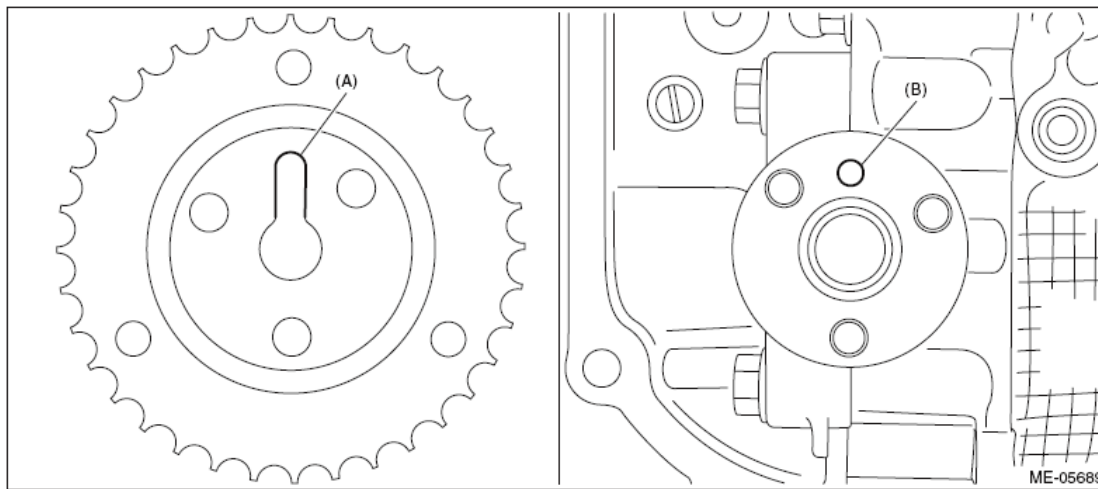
Identifying Knock Hole Of Exhaust Cam Sprocket And Knock Pin Of Exhaust Camshaft
